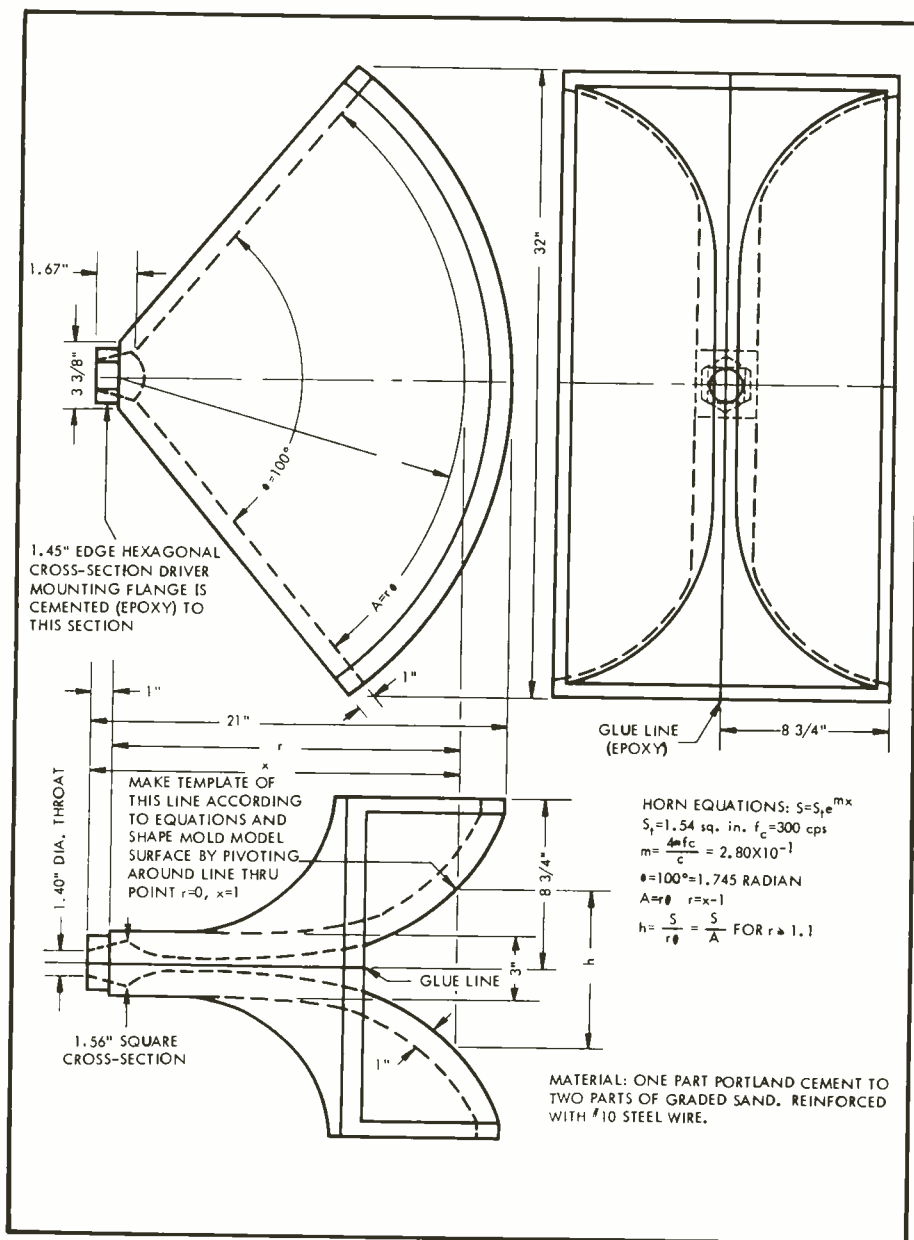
High frequency concrete exponential sectoral horn for Altec Lansing 288C driver. Horn consists of two identical castings cemented together and a hexagonal flange for mounting the driver. Flange is made from two pieces of 1/16-in. sheet steel and is not shown in this drawing.
